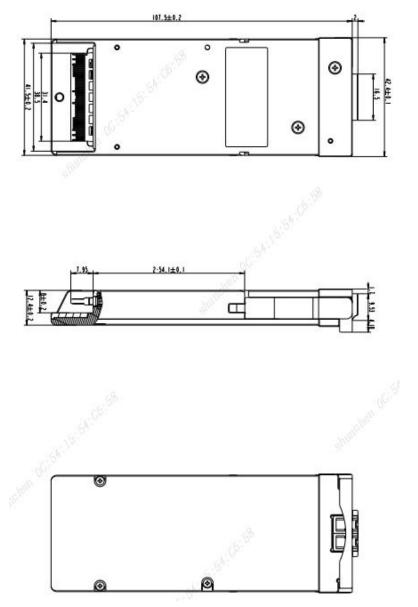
Mechanical Dimensions of the CFP2 Optical Module
